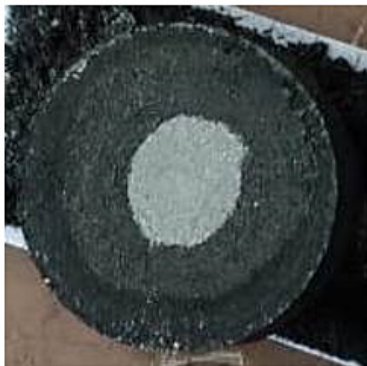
Cross section of fabricated FGM sample showing 4 layers of composition before hot extrusion.
